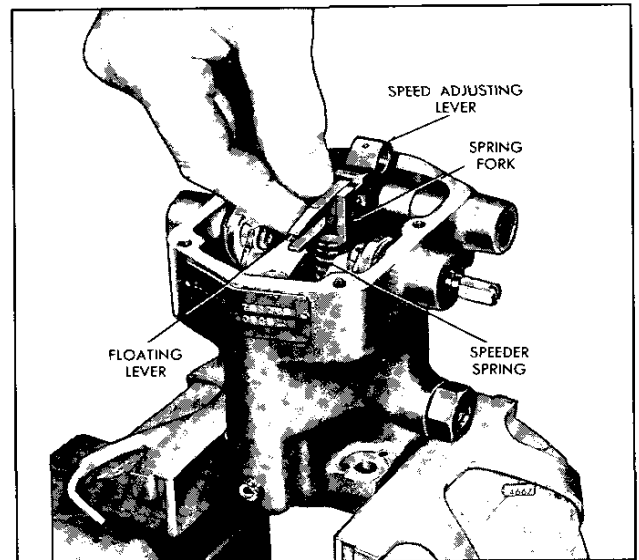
Removing Speed Adjusting Lever, Floating Lever, Spring Fork, Speeder Spring and Pilot Valve Plunger Assembly
